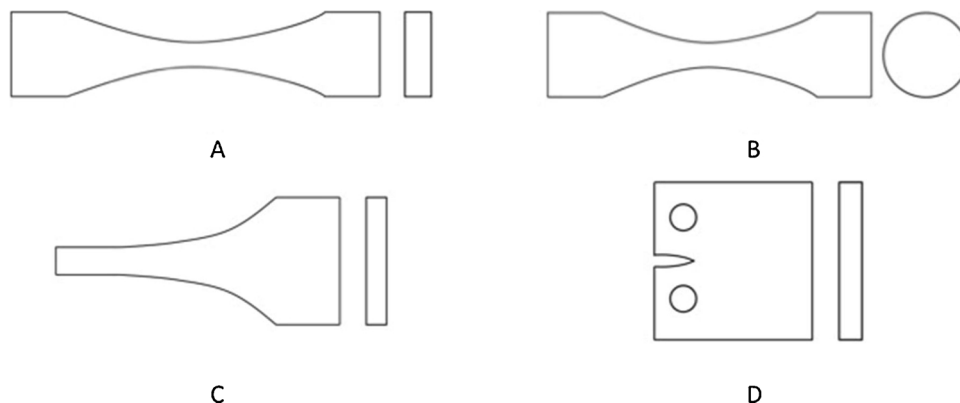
Four examples of fatigue testing specimens that include A) an axial loading specimen, B) a rotating bending specimen, C) a reverse bending specimen, and D) a fracture mechanical test specimen.
